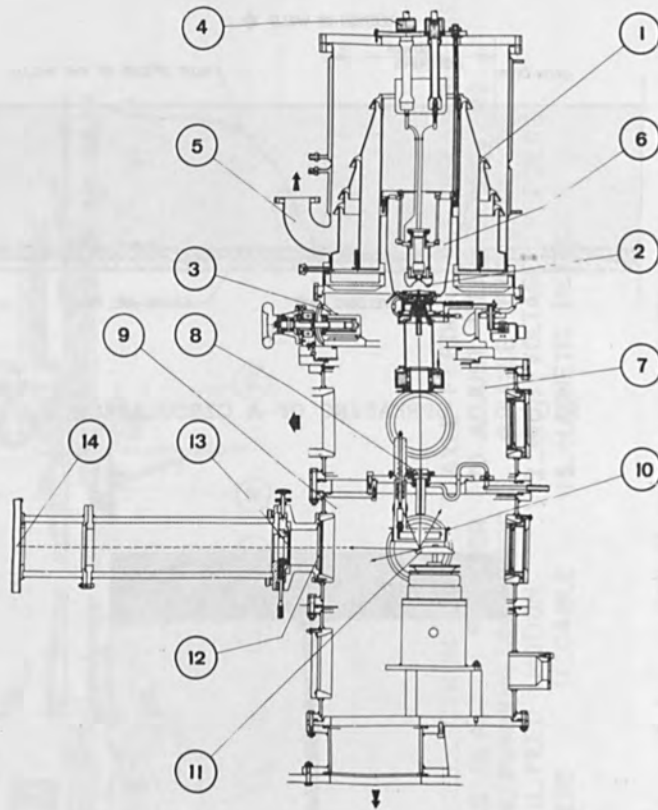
SPREADING OF A CIRCULAR WELD
